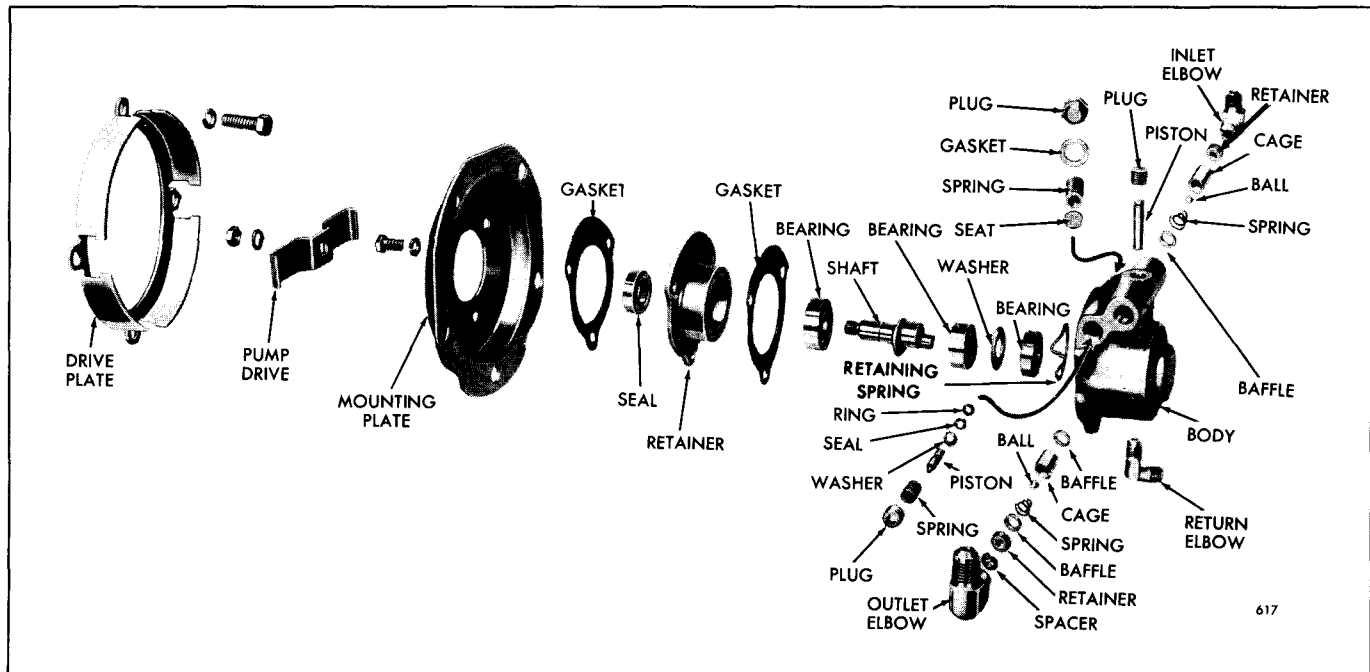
Direct Engine-Driven Charging Pump Details and Relative Location of Parts
